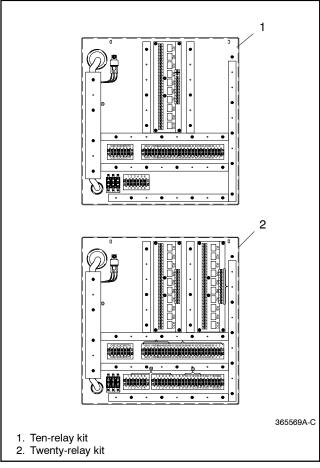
Dry Contact Kits (shown mounted on an assembly panel for 450 kW and larger generator sets)
